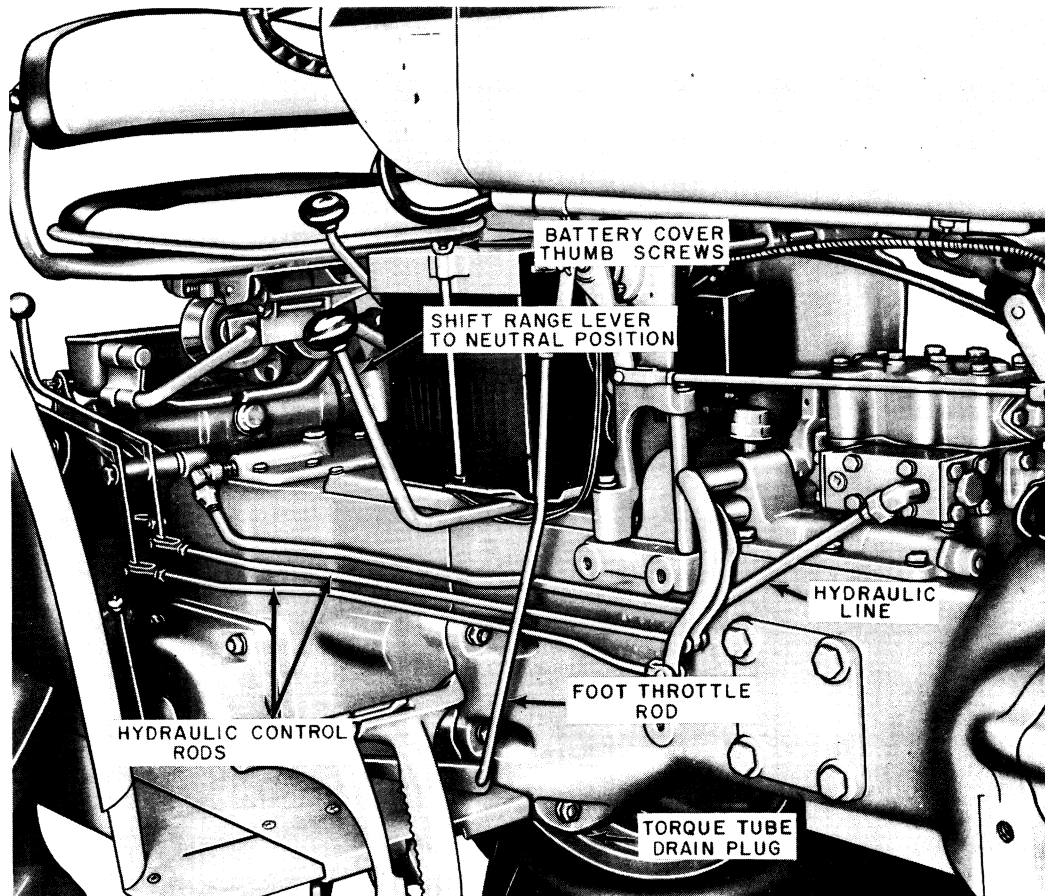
Items To Be Removed When Splitting Tractor At Rear Of Torque Tube
